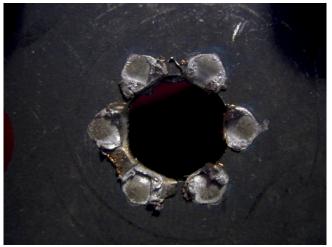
A M6 nut welded to 2-mm boron.
